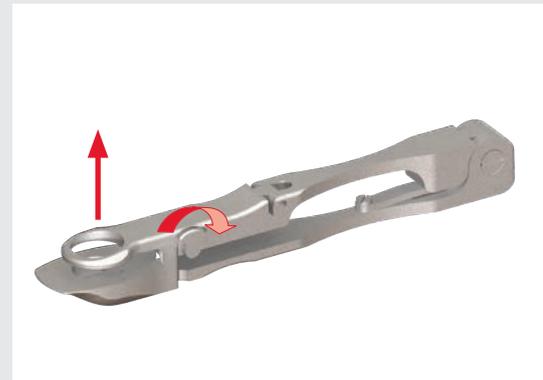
Unlocking the locking mechanism and lifting the upper handle
